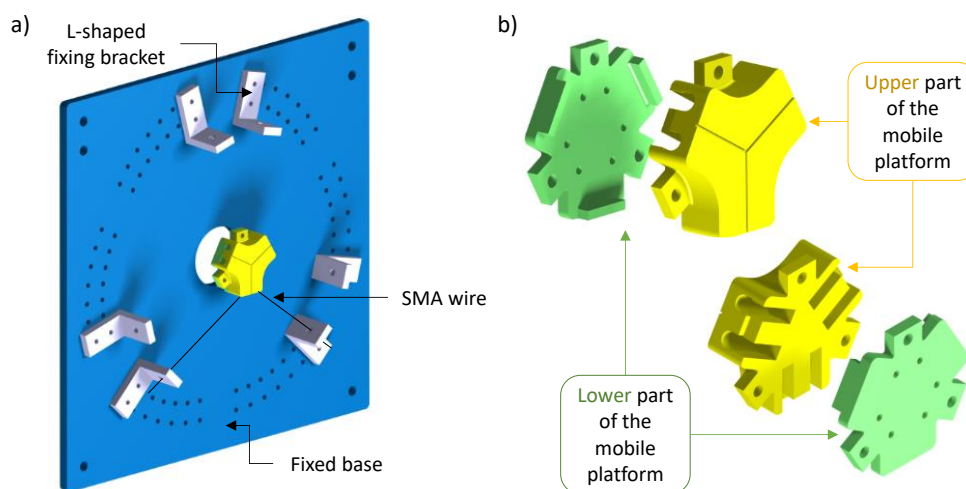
Main components of the third design. (a) Overview of the mechanism. (b) Exploded view of the mobile platform.
